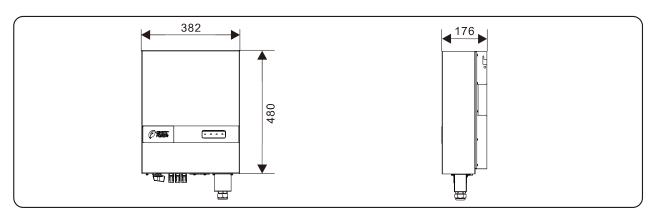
The dimensions of the inverter by front & side views (unit: mm)
